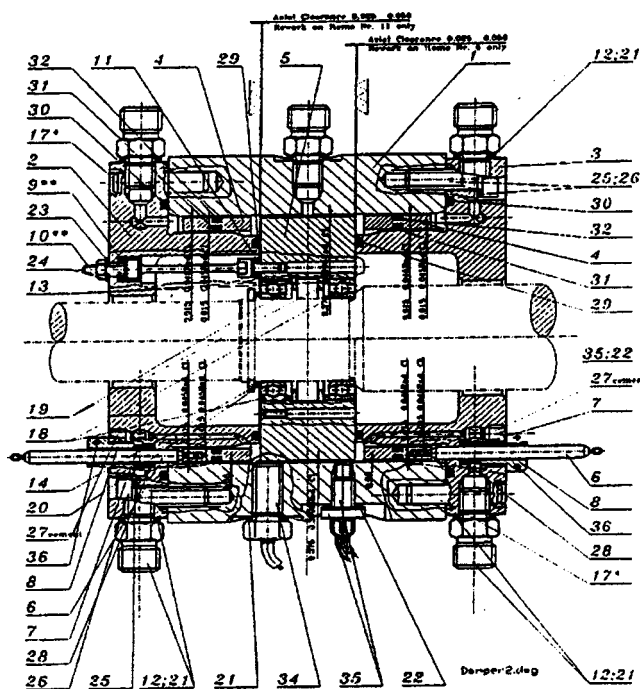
Cutout of manufactured hybrid squeeze film damper (HSFD)
